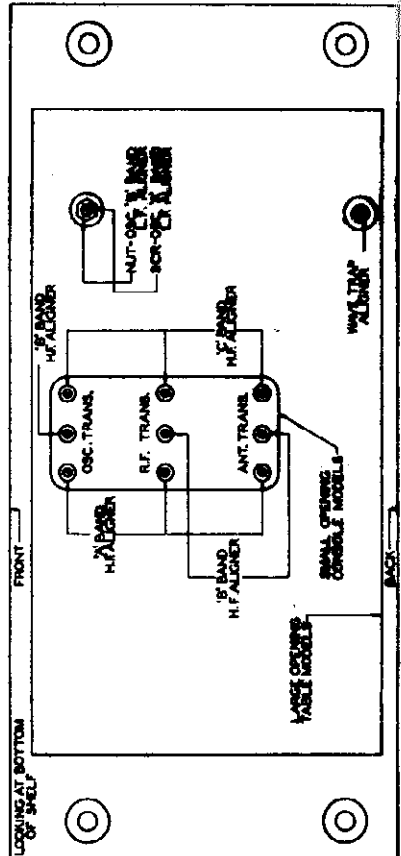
View Through Chassis Showing I. F. Aligning Sections for
